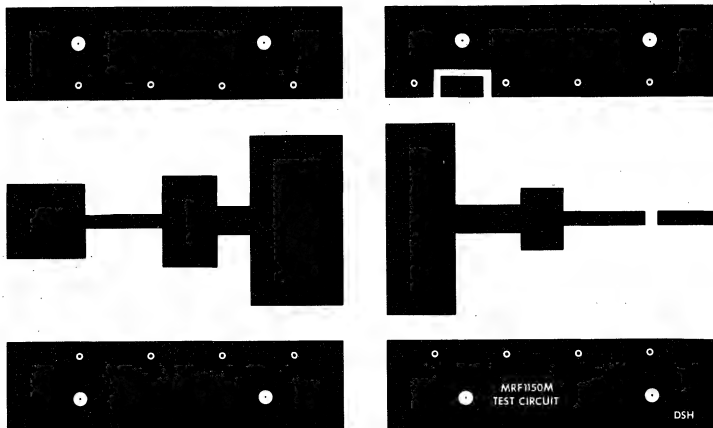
PRINTED CIRCUIT BOARD LAYOUT — 1090 MHz TEST CIRCUIT
